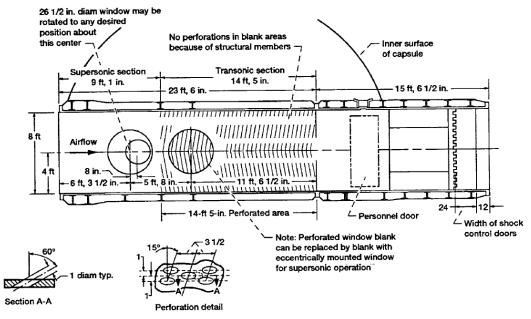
The 8x6 SWT Test Section Layout, dimension in inches.
